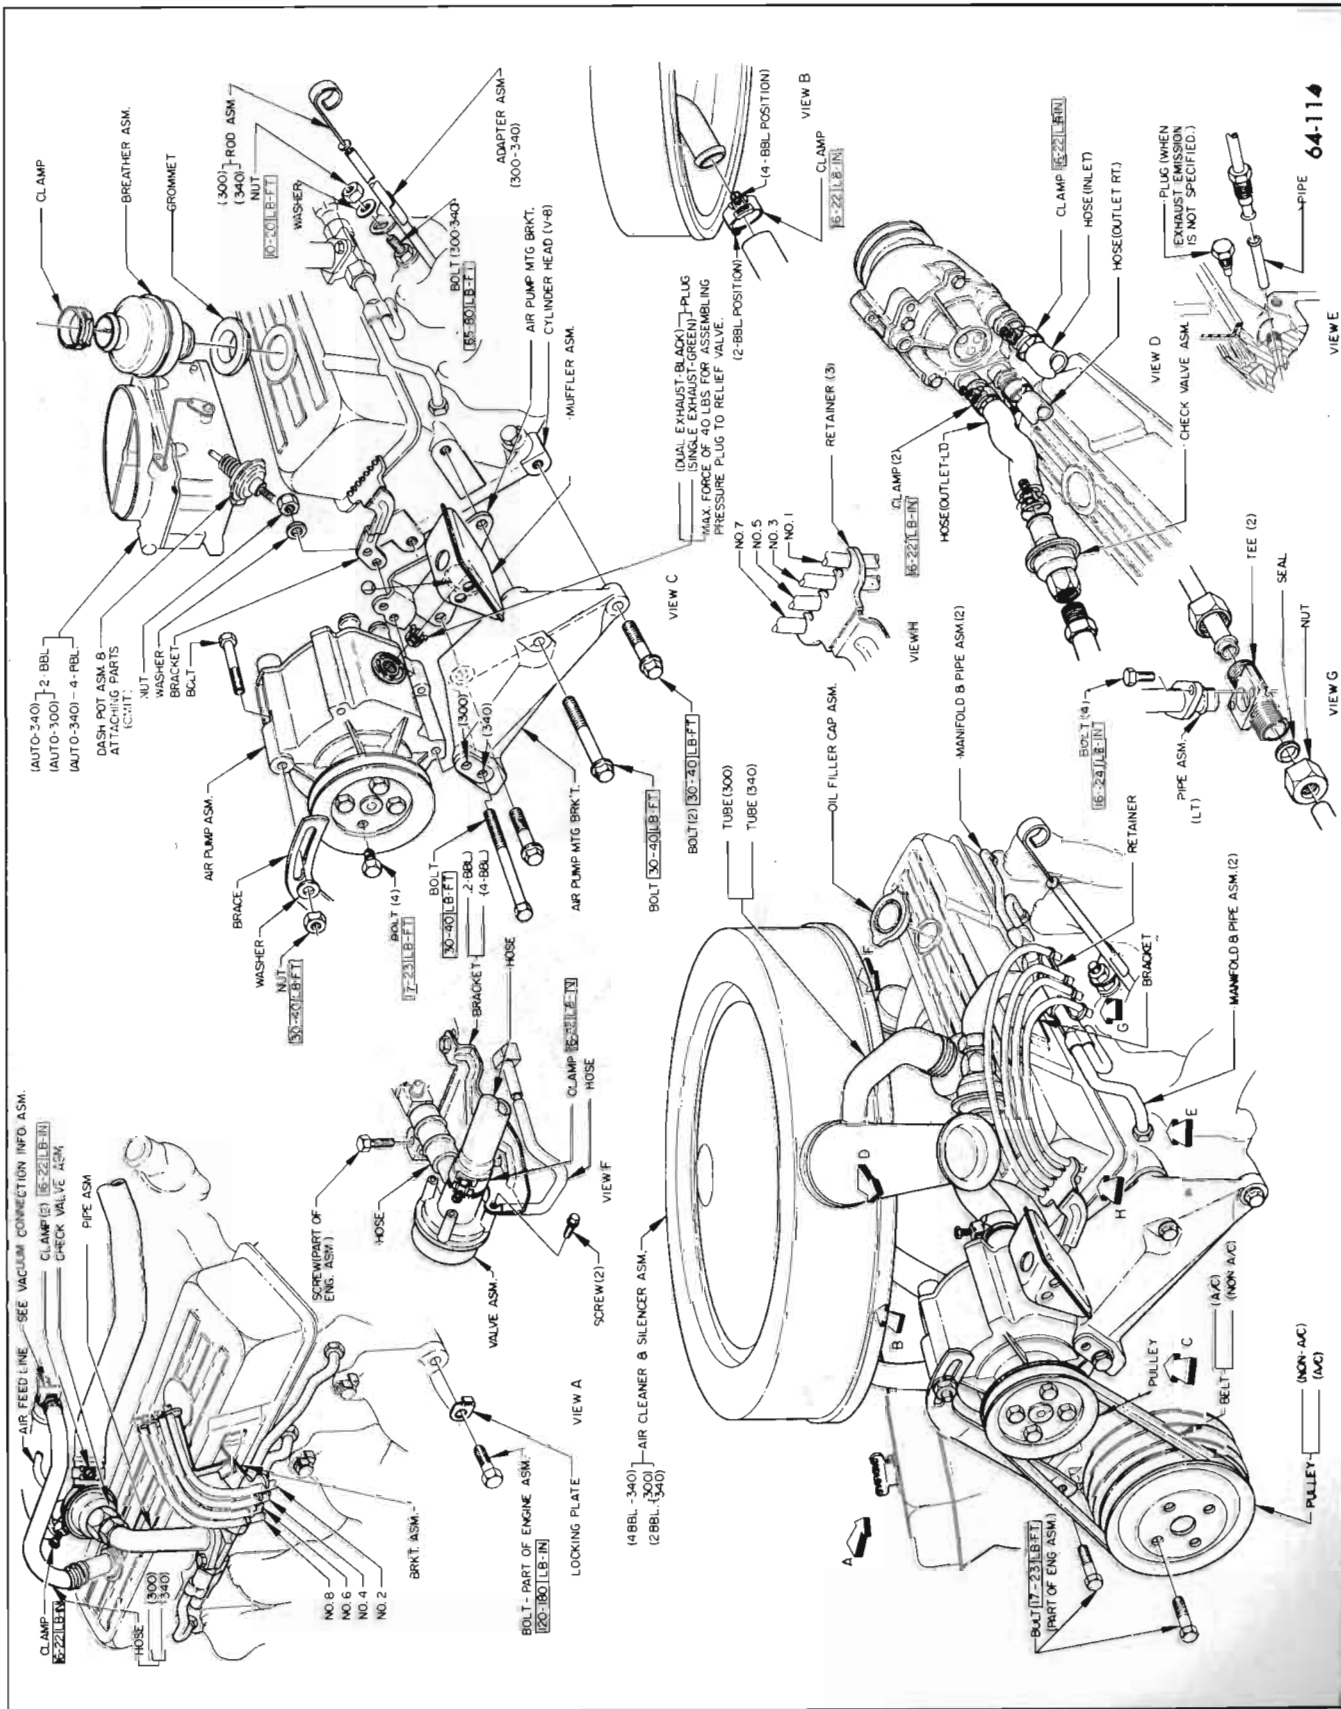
Exhaust Emission Control System - 300 and 340 Engine Less Power Steering
